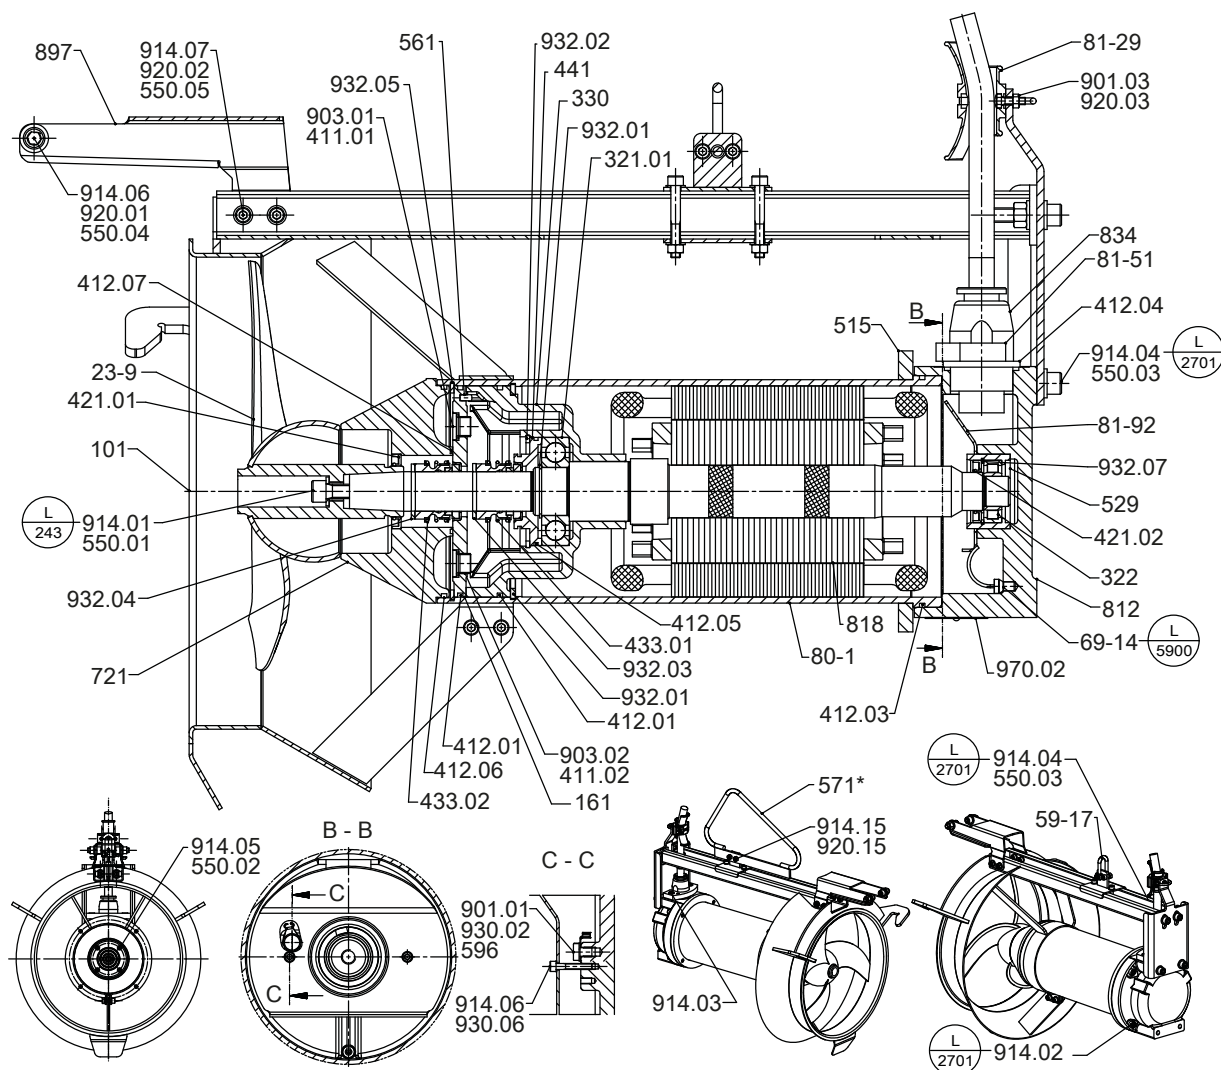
General assembly drawing: a) with shackle b) with bail (optional)
